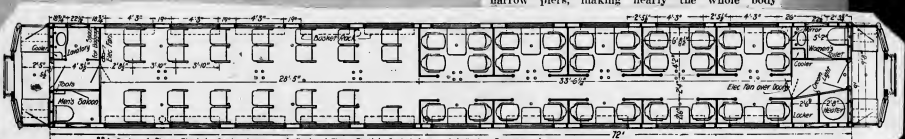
Floor Plan of New Cars, St. L. & S. F. R. R.
